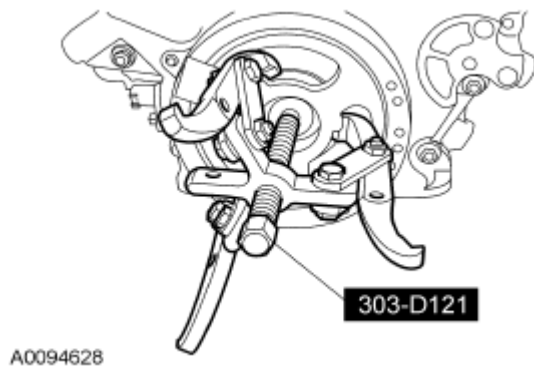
Identifying Special Tools (303-D121) And Crankshaft Pulley
